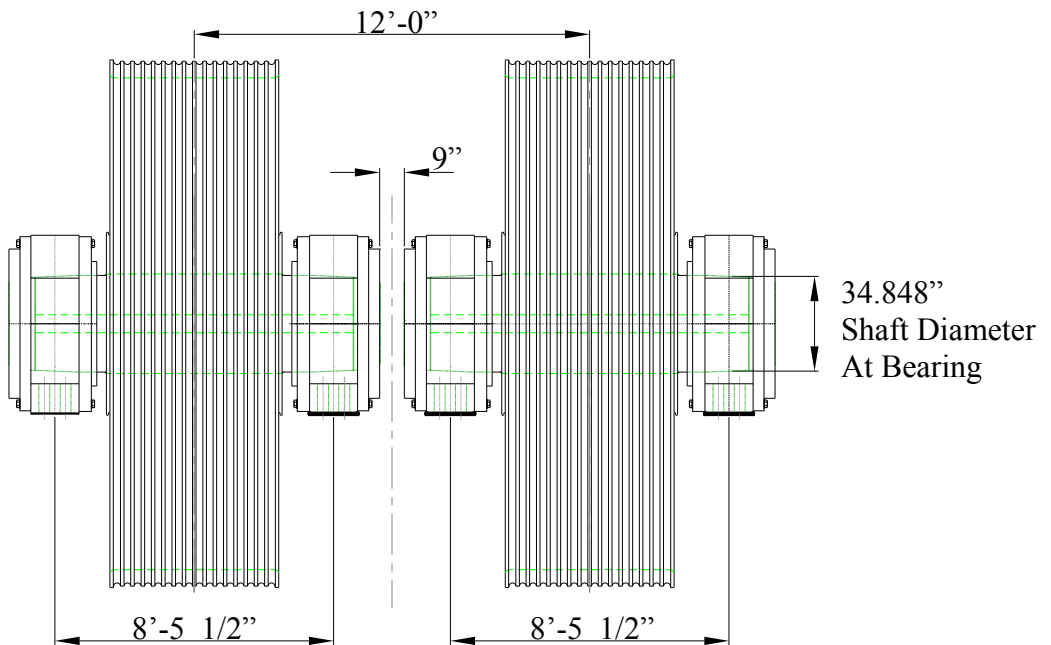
Elevation View of sheave pair with roller bearings. Note bearing center distance was increased, as well as work space between inboard bearings.
